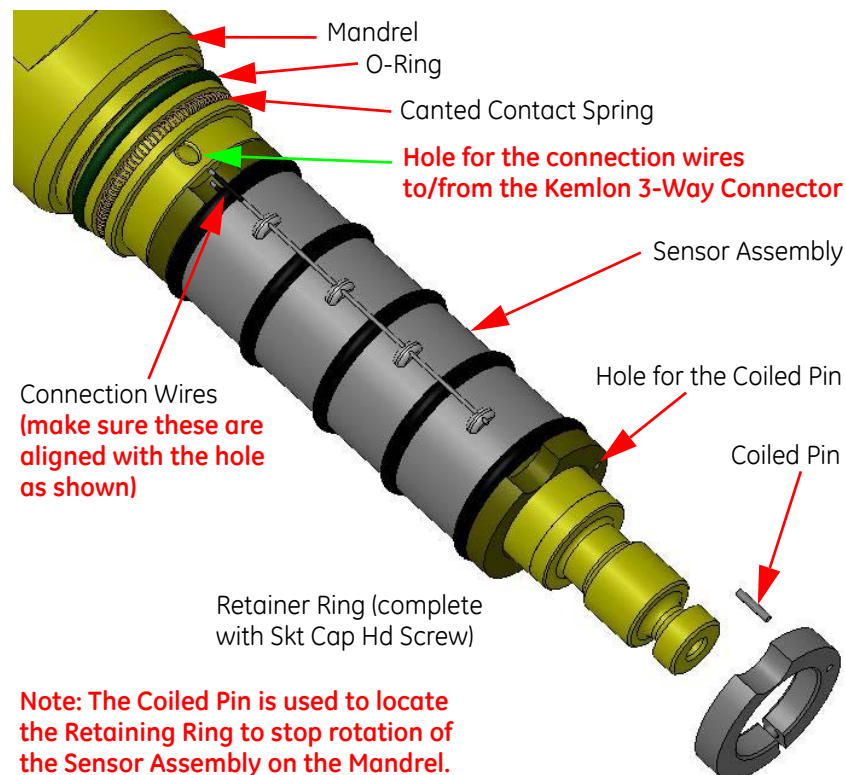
Sensor Assembly located correctly on the Mandrel
